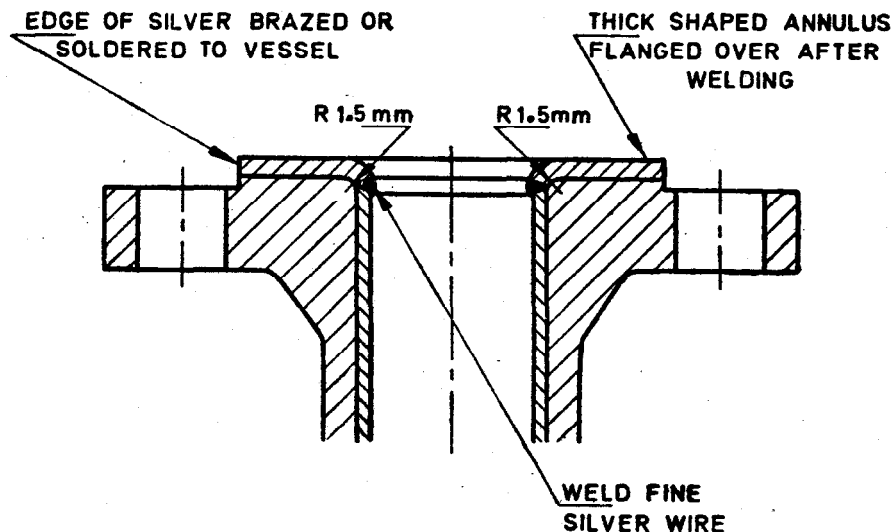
TYPICAL METHOD FOR SILVER LINING OF FLANGE FACE WHERE MACHINING IS REQUIRED
